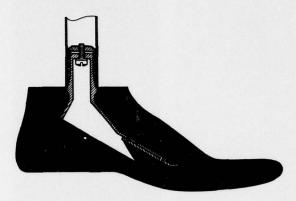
Construction details of the metal-keel SACH foot with integral pylon coupling.
